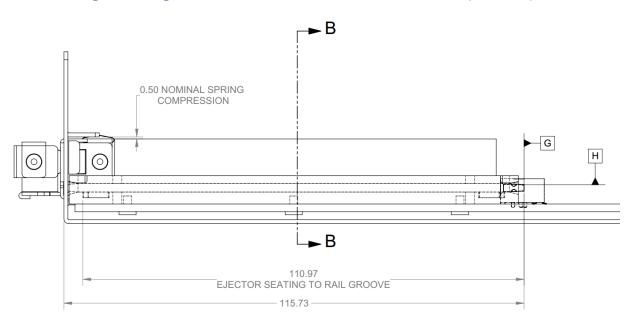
Large Form Factor Baseboard Chassis CTF Dimensions (Side View)
